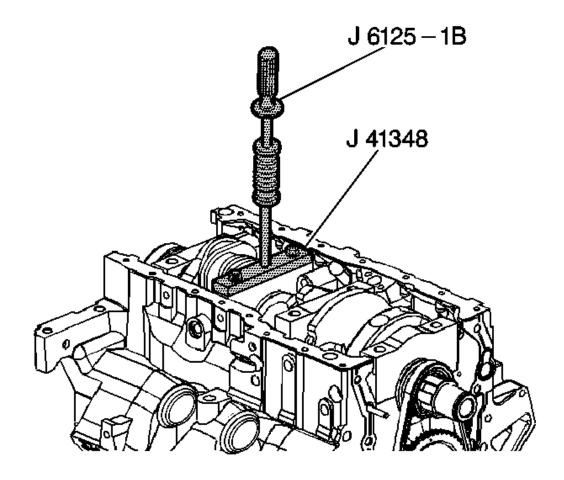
Removing Main Bearing Caps Courtesy of GENERAL MOTORS CORP.
